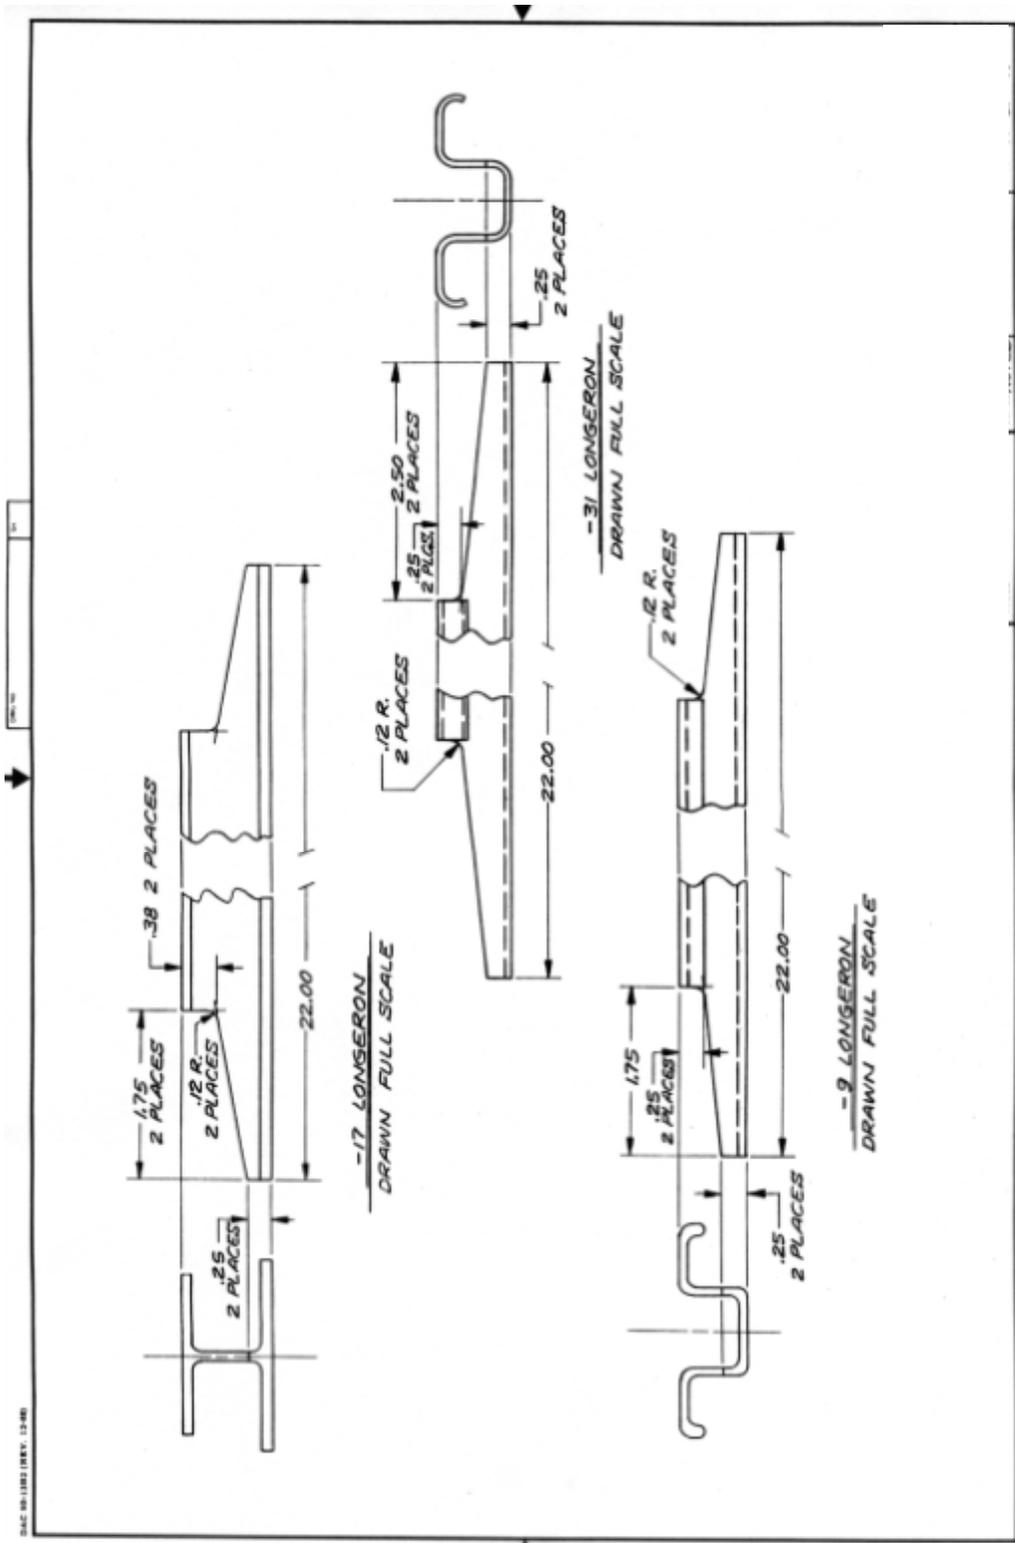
EQUIVALENT INITIAL FLAW SIZE PANEL ASSEMBLY DRAWINGS
